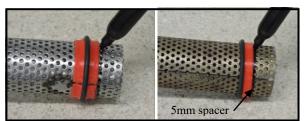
Sharpie final cut line marking for 28mm Left, 30mm Right.
